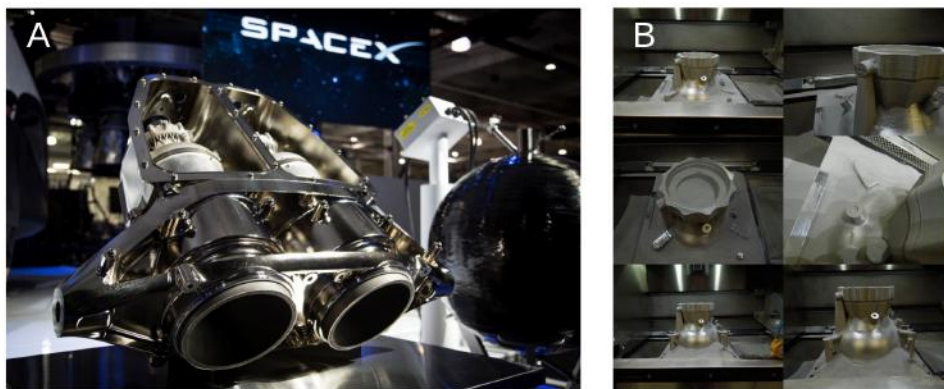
(A) completed SuperDraco engine [4]. (B) SuperDraco engine before removal from the EOS SLM machine [5]
